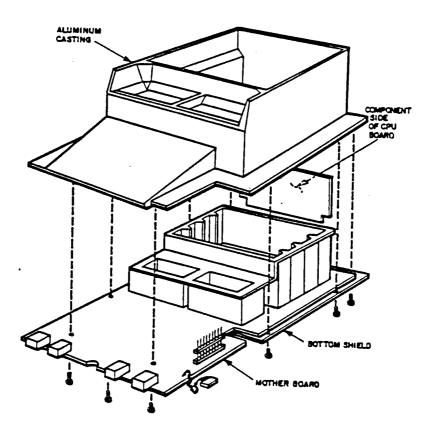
ATARI 800 Console, CPU Printed Circuit Board Removal
